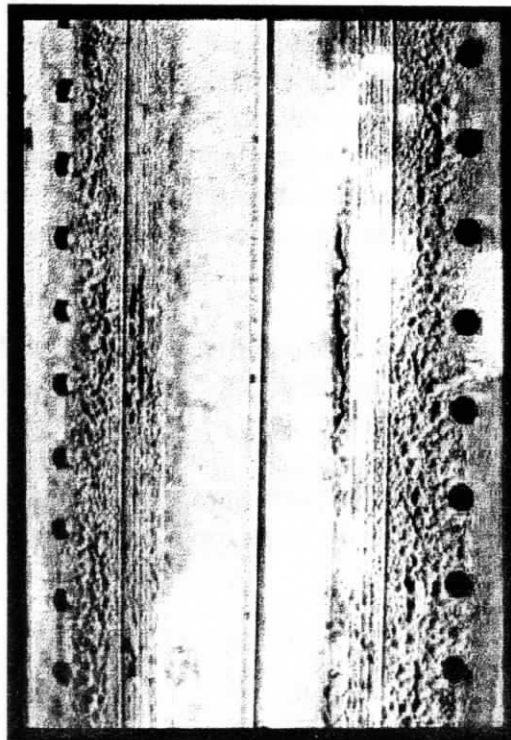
Showing severe cracking wear and corrosion on back side of track casting.
